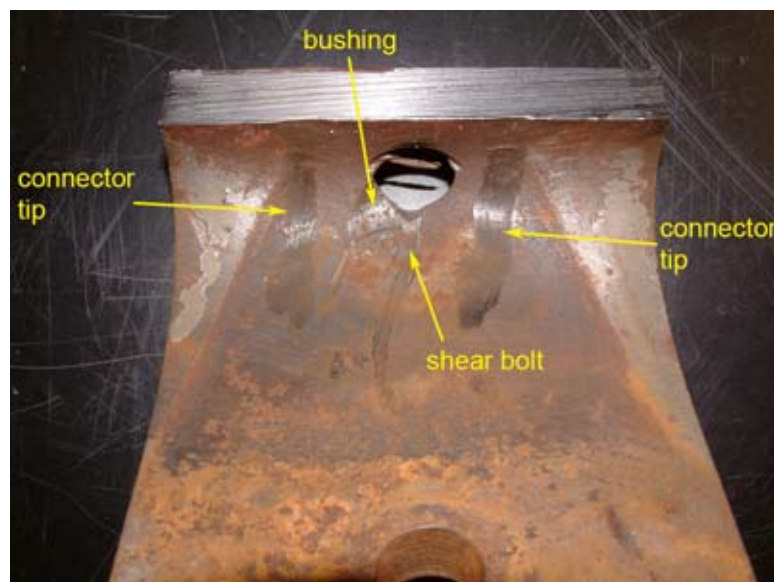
Bent bottom plate with rub marks caused by parts of the head-to-tube connector
